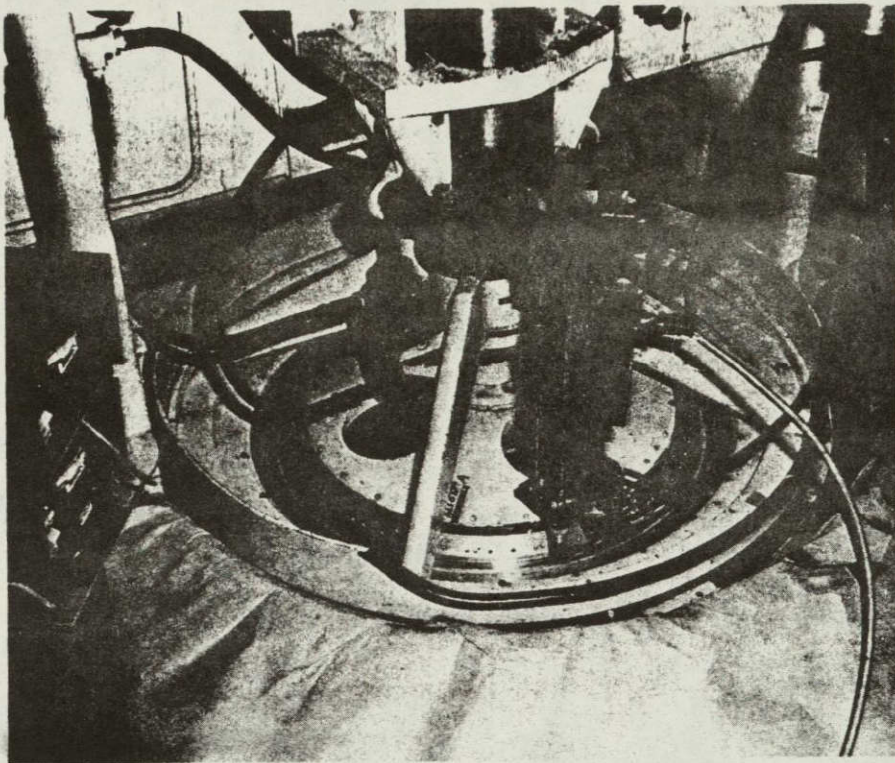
Forward bulkhead cap welding operation.
